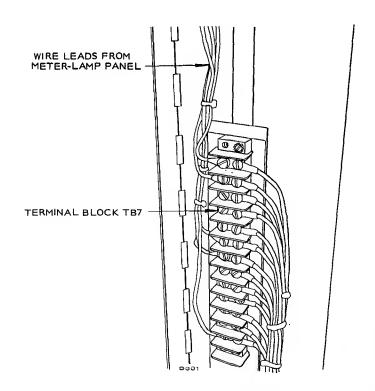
METER-LAMP PANEL TERMINAL BLOCK TB7
